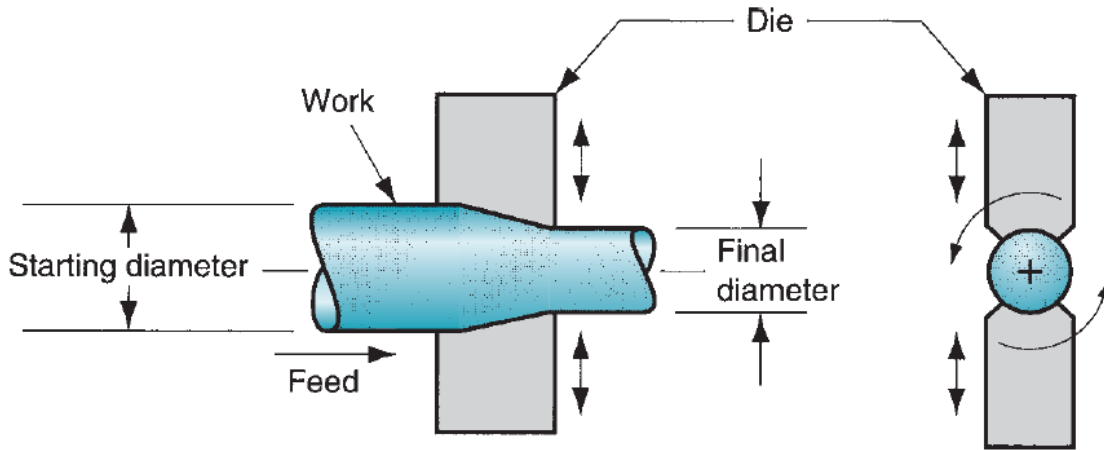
Swaging process to reduce solid rod stock; the dies rotate as they hammer the work. In radial forging, the workpiece rotates while the dies remain in a fixed orientation as they hammer the work
